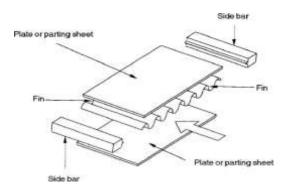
A stack of fins placed between the parting sheets (Shah and Sekulic [39])
